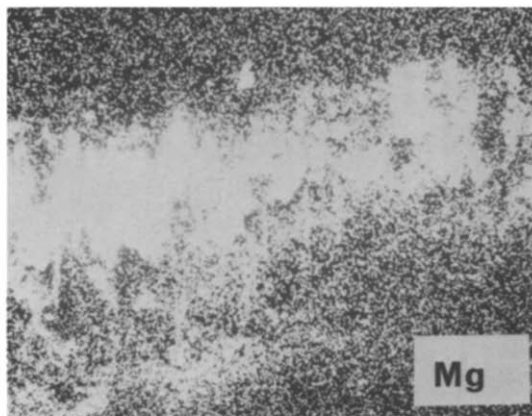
shows the flank face of CC 670 after machining IN 718 for 5 min at 450 m/min and 0.15 mm/rev. Layers containing mainly Mg could be observed on the lower part of the flank face.
